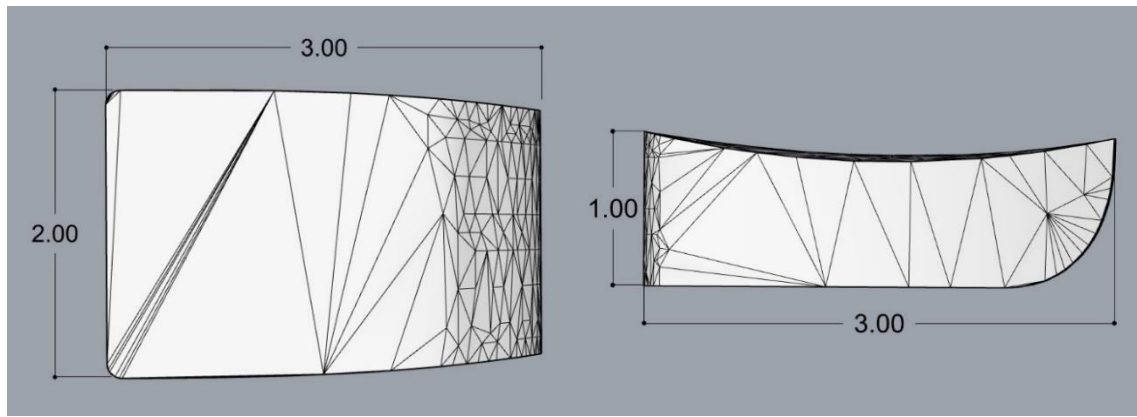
C. Dimensions of Horizontal Rectangular attachment.
